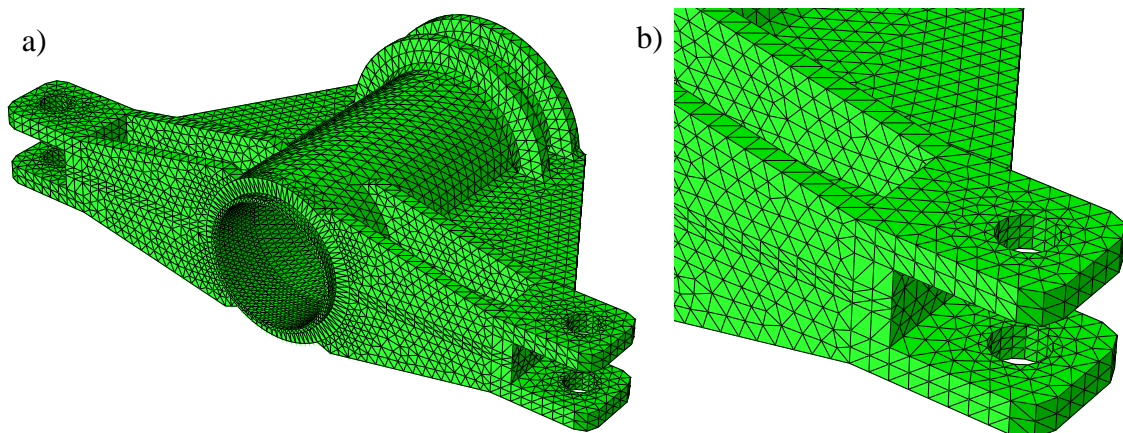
Finite element mesh of the tubeholder (a) and detail view of the pin joint (b).
